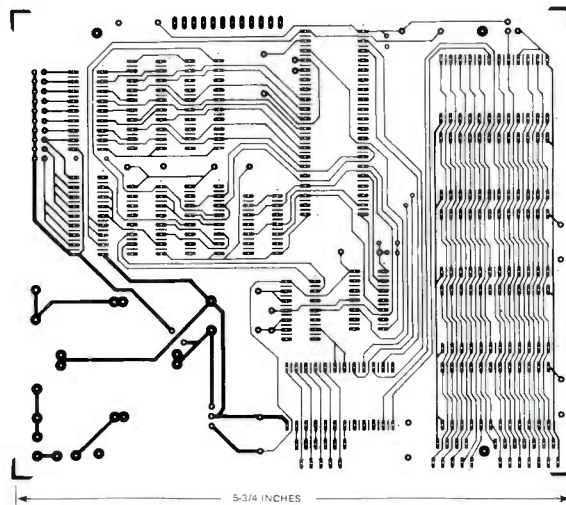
THE FOIL PATTERN for the reverse side of the main board shown here half size.
